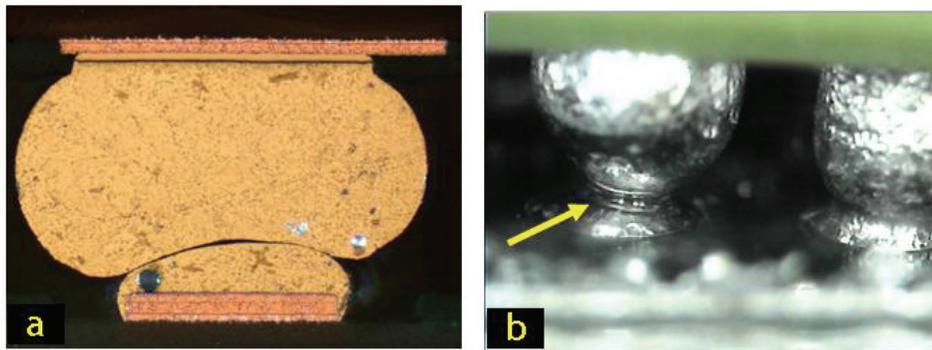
Examples of HnP defects a) optical micrograph of solder joint cross section, and b) Side view of a row of BGA balls with HnP at arrow.
